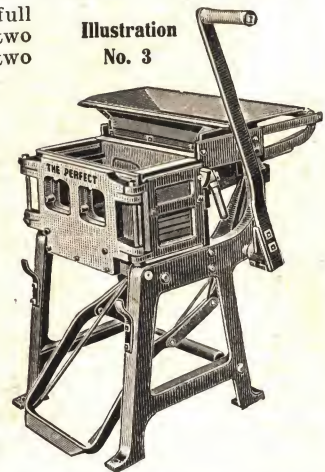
Illustration No. 3. Machine with mold box closed ready to draw hopper forward for easy filling.
